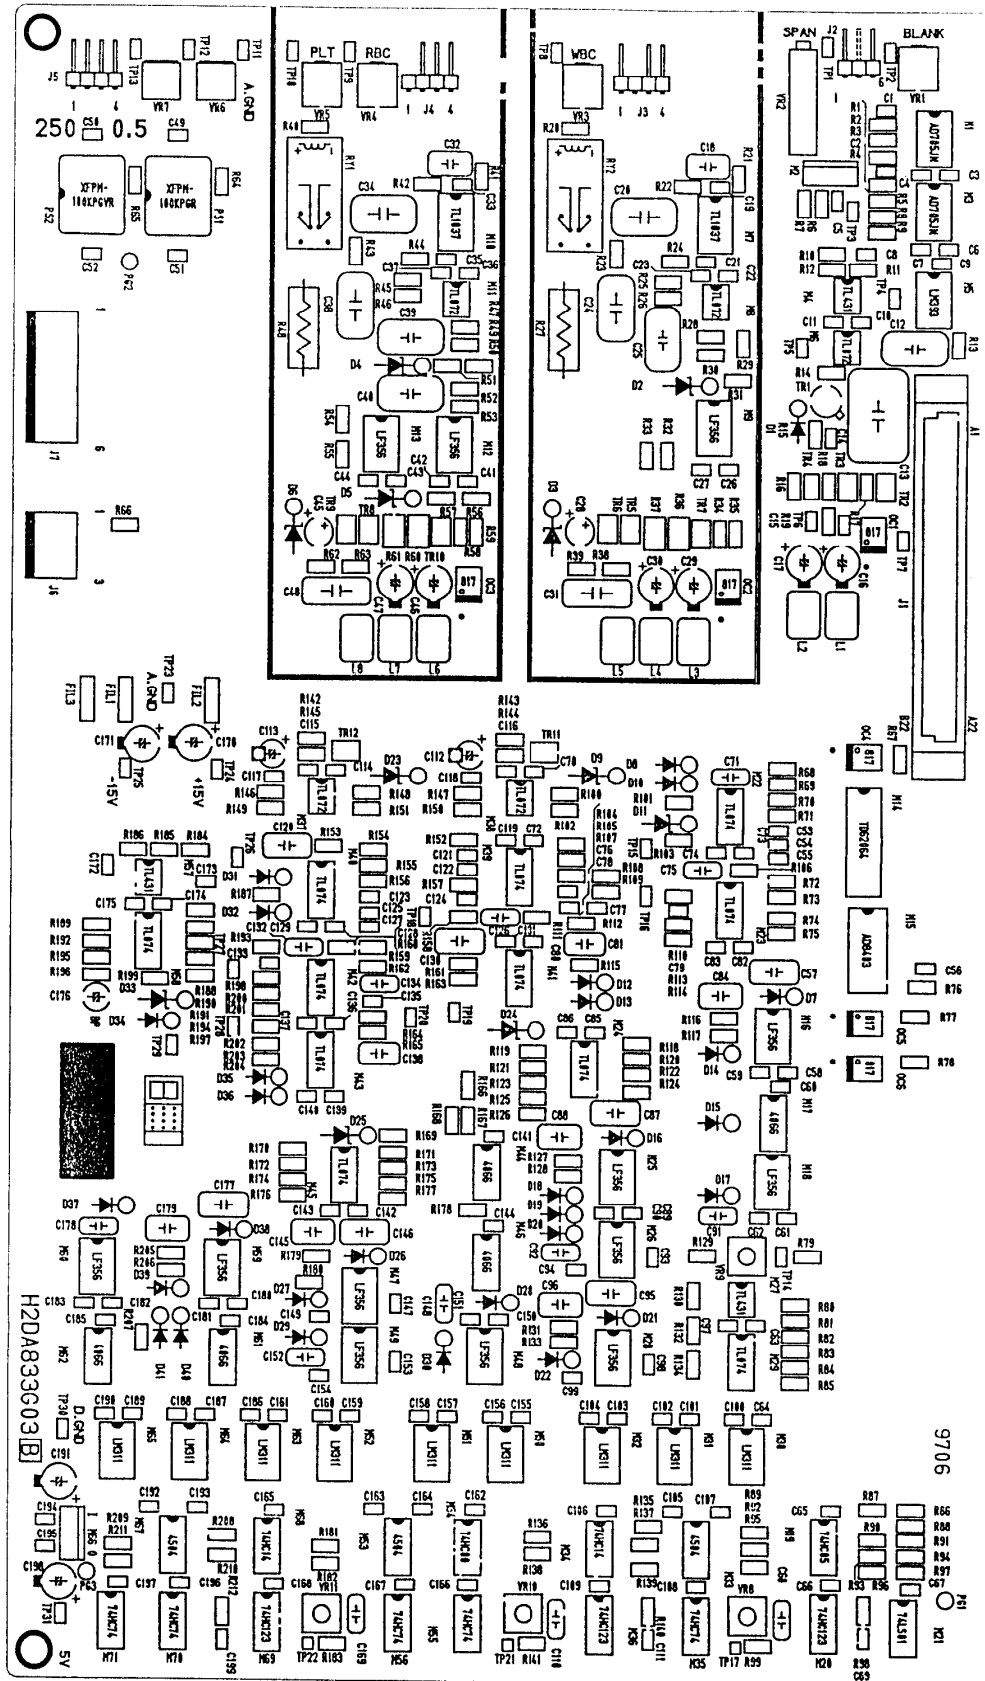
PCB No. 2135 Assembly Drawing (KX-21) 3
